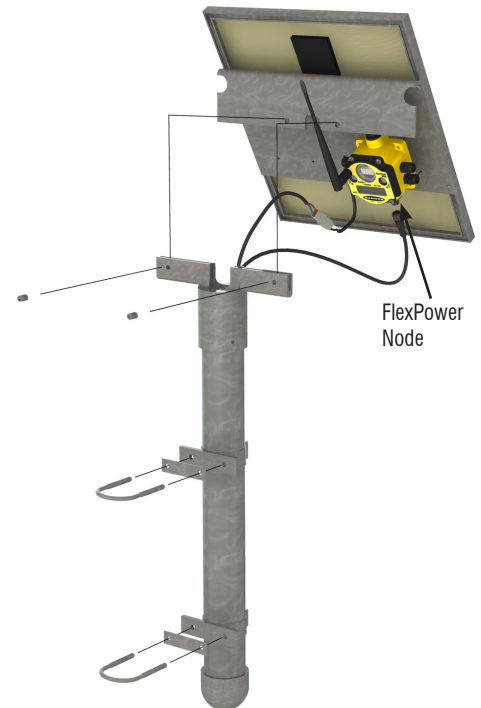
Exploded view of the Solar Supply showing a FlexPower Node connected to the splitter cable. (FlexPower Node sold separately.)
